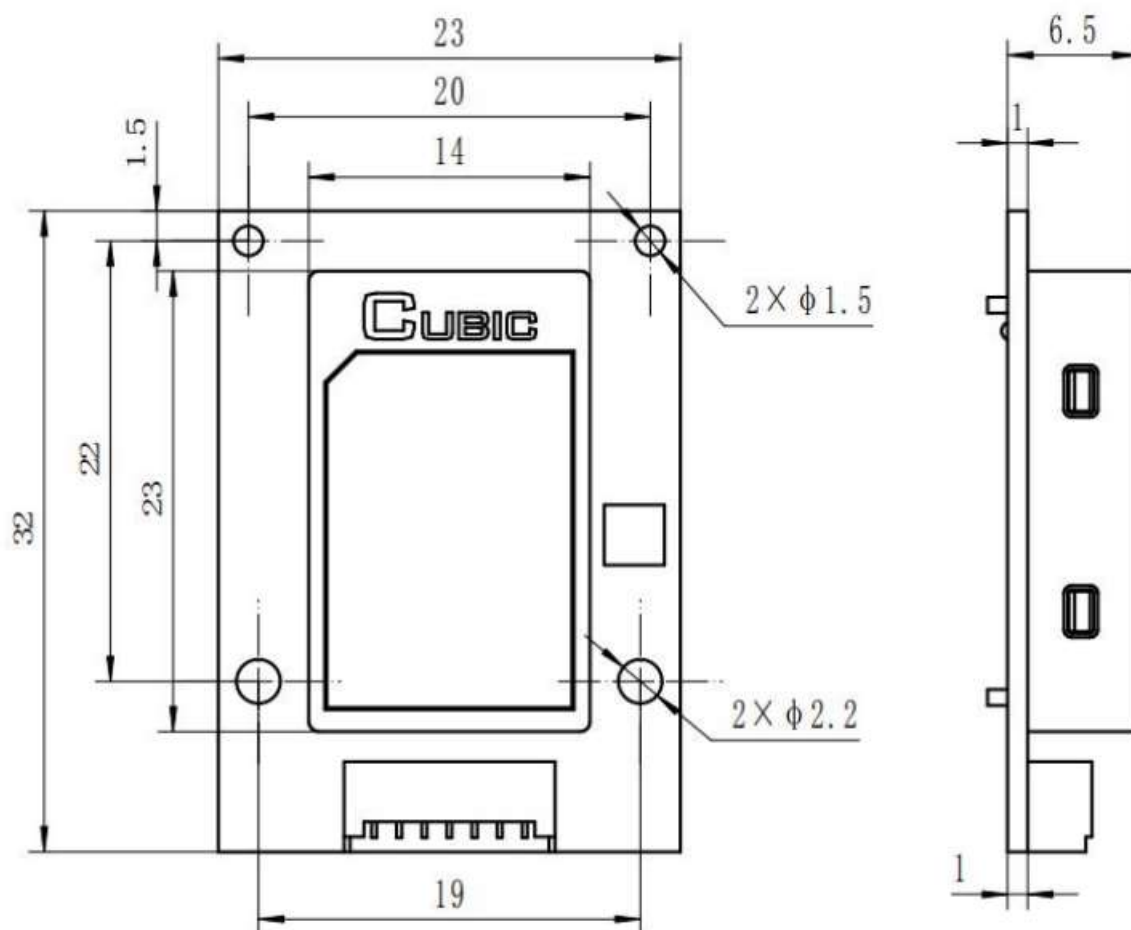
CB-HCHO (Forth Generation) Appearance dimension drawing (unit: mm, tolerance ± 0.2 mm)
